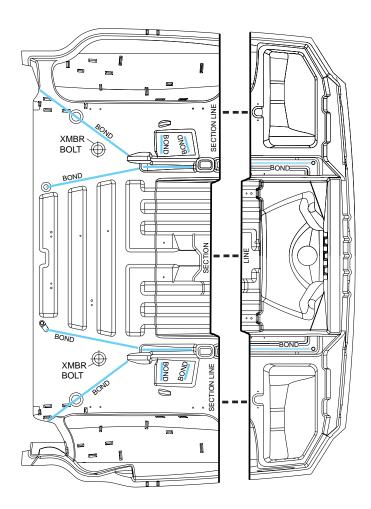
Top View of Rear Compartment Panel Section Lines Etched in All Parts
